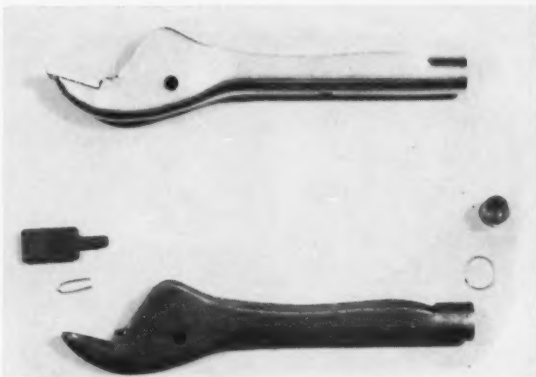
Components and assembly of special type clamping pliers carburized, brass brazed and hardened in a single operation.
